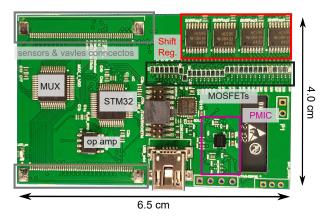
Different blocks of the PCB: power management unit, valve switches and control shift registers, microcontroller, amplifier for force measurements, sensors and valves connectors. The buck converter is mounted at the other side of the PCB.
